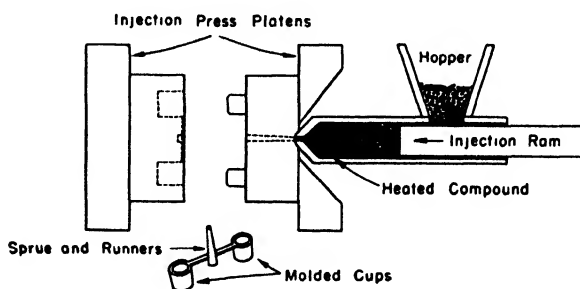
Schematic sketch of the set-up for injection molding.
